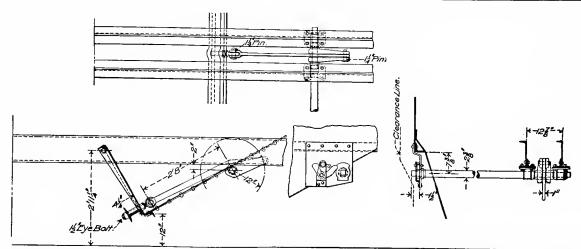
Dunham Hopper Door Apparatus for Pennsylvania Railroad All-Steel Hopper Car. United States Metal & Manufacturing Company.
